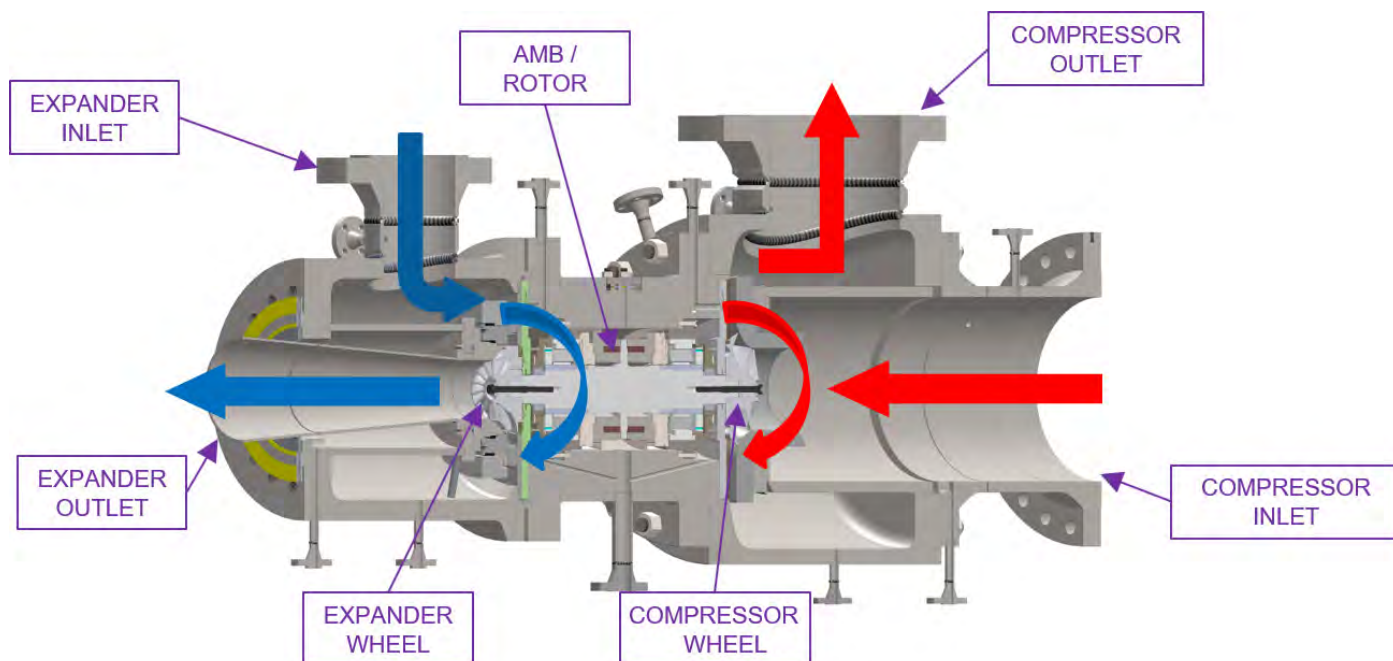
Typical turboexpander design equipped with active magnetic bearings
